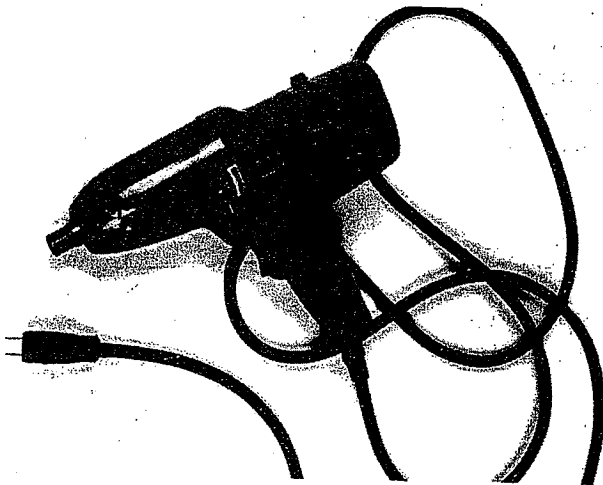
An electric wrench drives bolts or nuts electrically.
